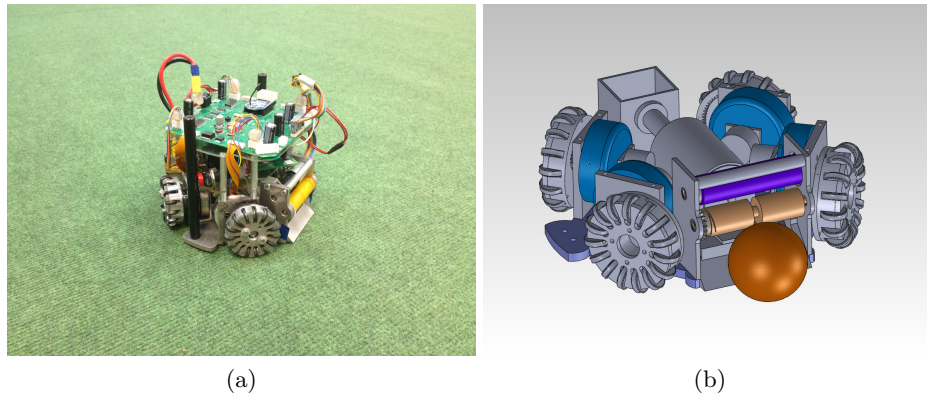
(a) BRocks robot, (b) Technical drawing of BRocks robots.
